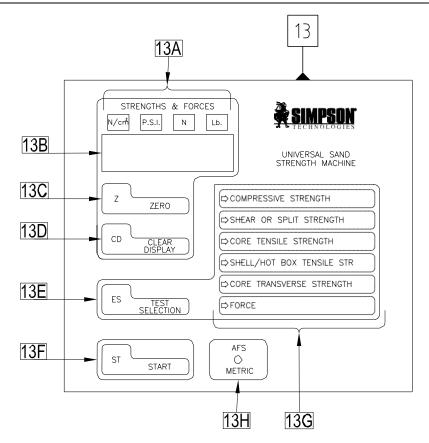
Electronic Panel Detail View - Electronic Universal Sand Strength Machine (Model 42104)
